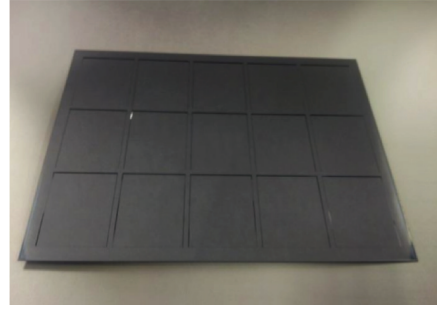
The prototype sensor after laser cutting of the wafer.
